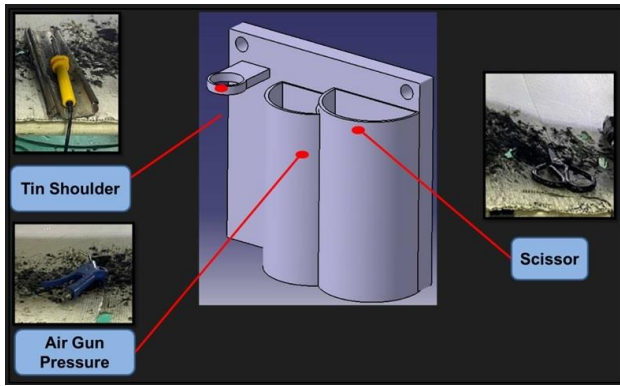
Design for storage equipment at Woodstock assembly workstations
